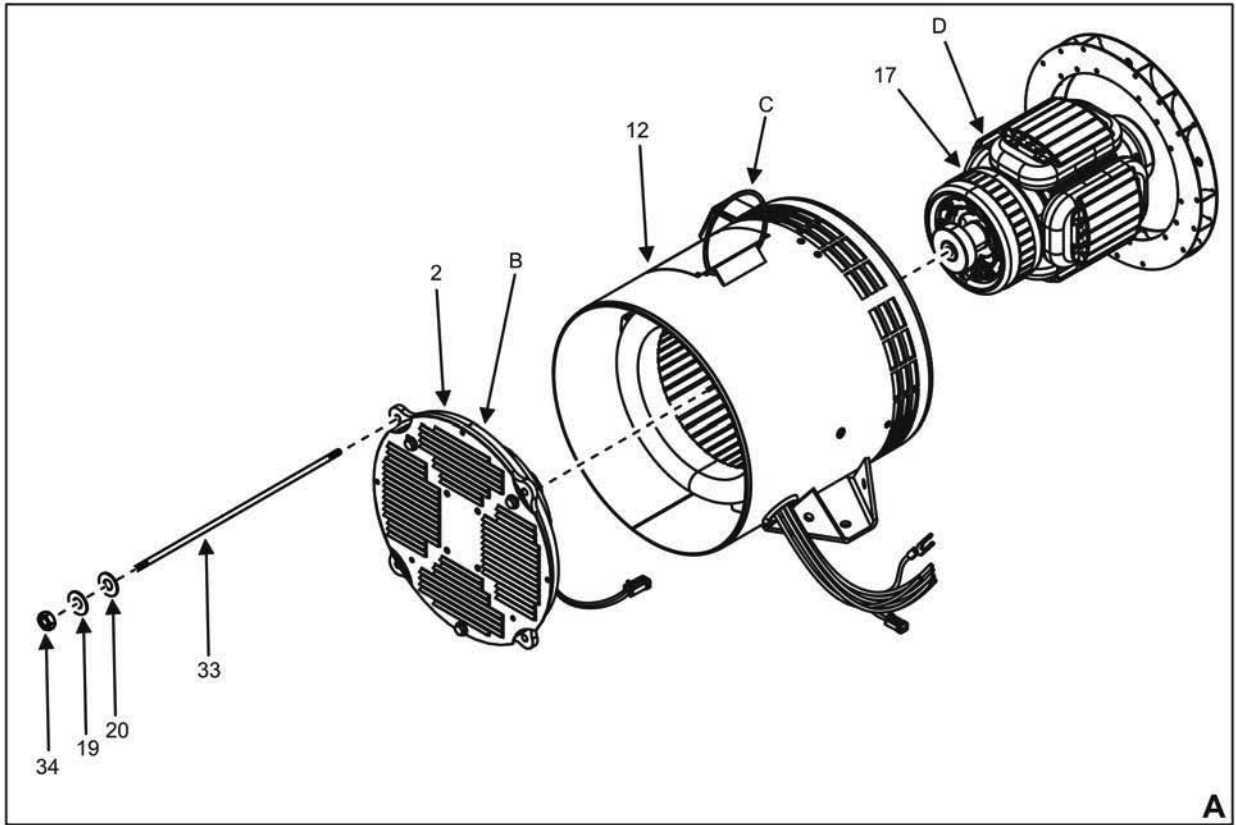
AC Generator Assembly, 50/60 Hz (Sheet 2 of 3).
